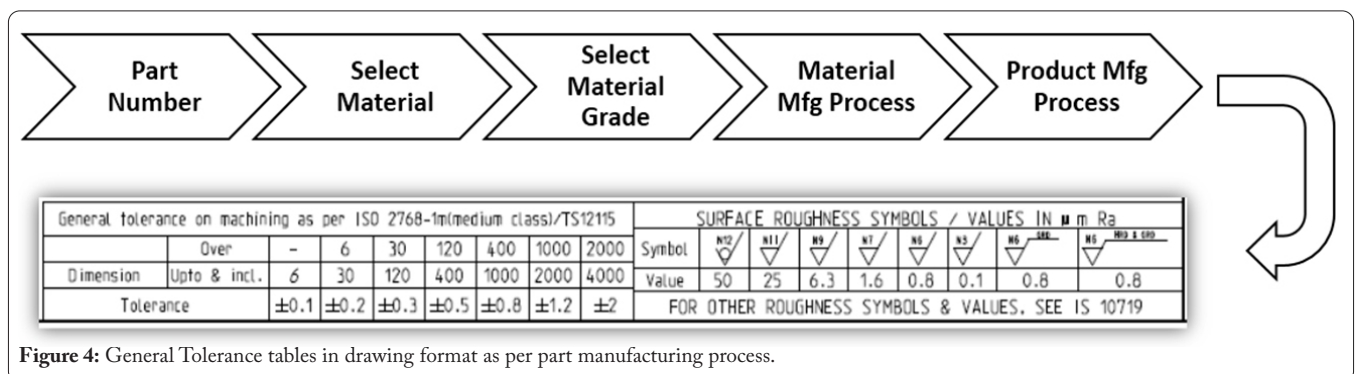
General Tolerance tables in drawing format as per part manufacturing process.
